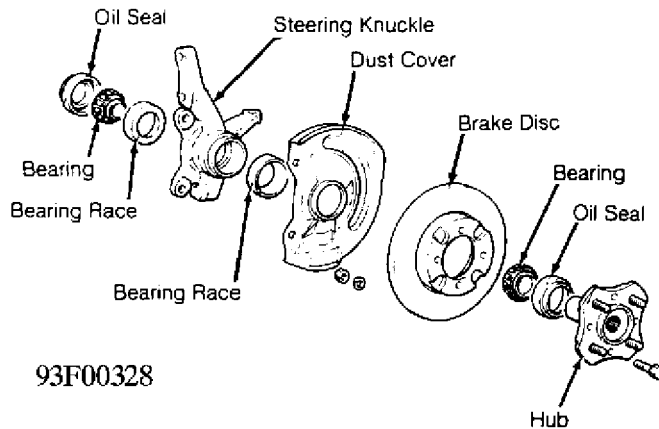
Exploded View Of Steering Knuckle & Hub (Colt, Colt 200, Mirage & Summit; Precis Is Similar)
